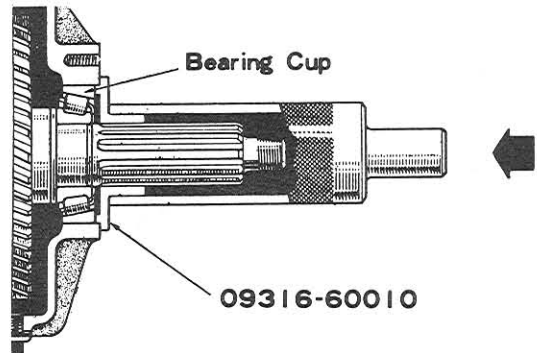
Transfer Output G2394 Shaft Bearing Cup Installation
